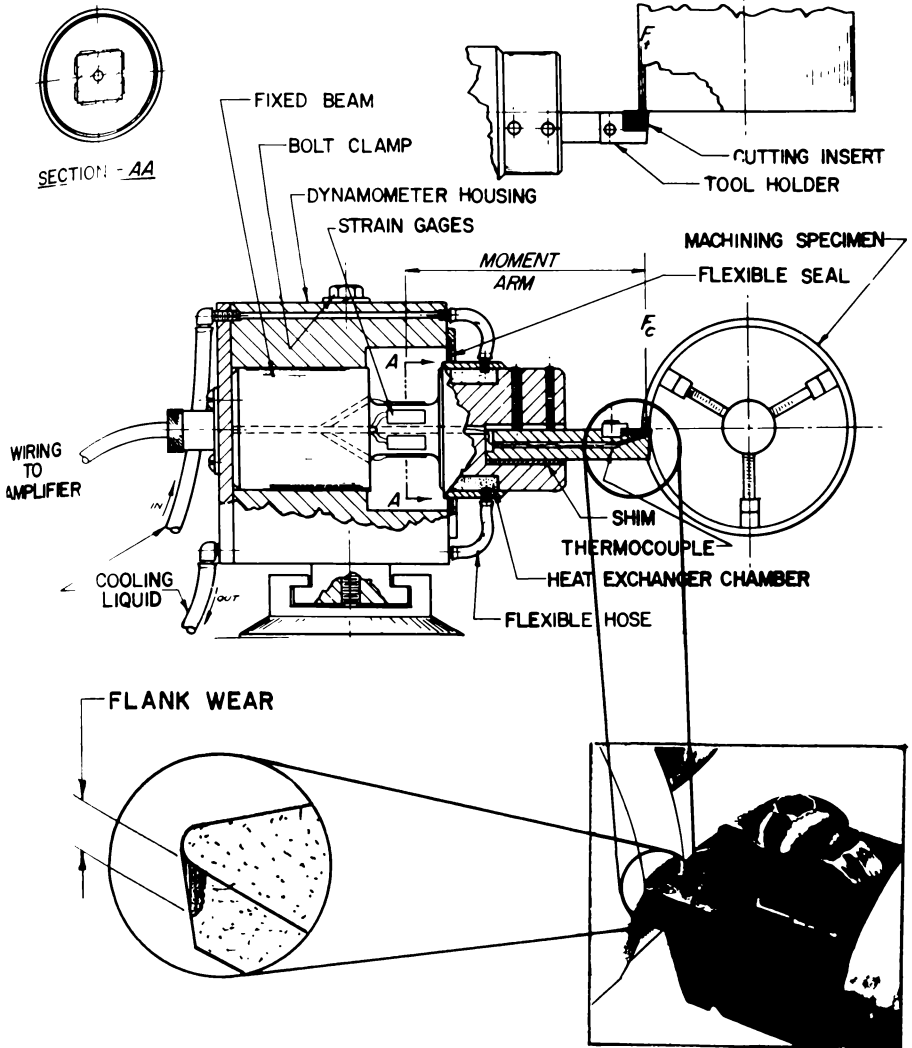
Experimental set-up illustrating method of measuring cutting forces and tool wear.
